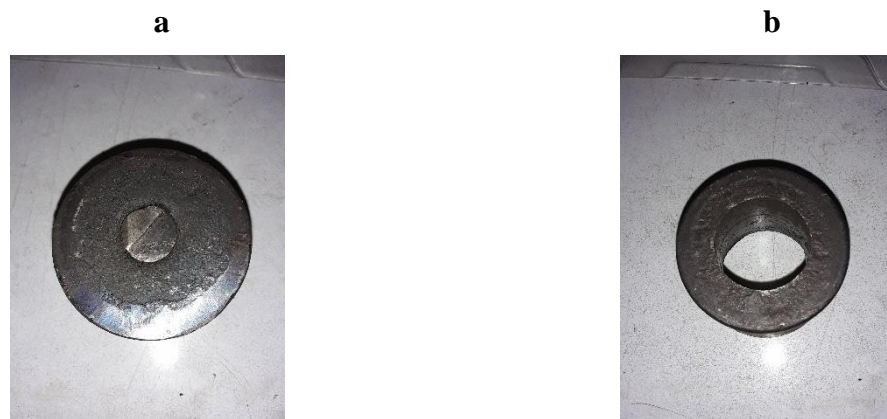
The sample After a) removing ejector pin mark and b) hole drilling in the center zone
